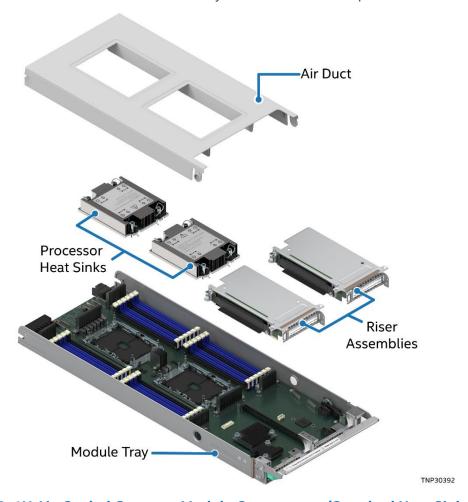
1U Air-Cooled Compute Module Components (Standard Heat Sinks Shown)
